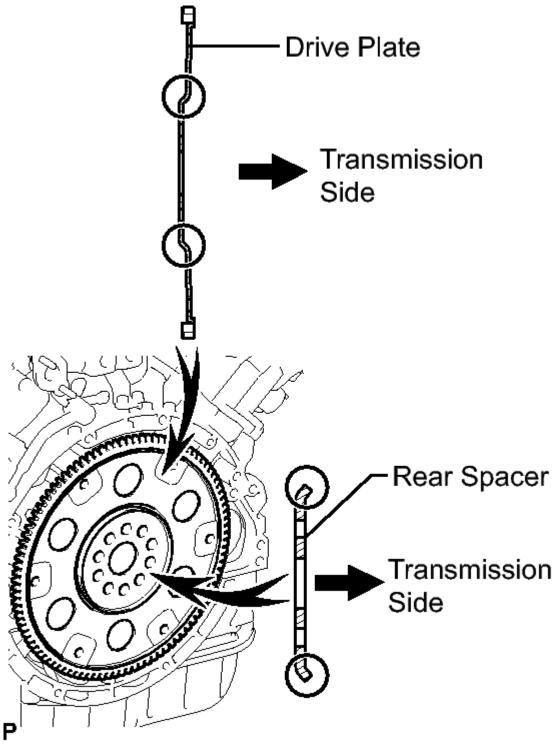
Identifying Drive Plate & Rear Drive Plate Spacer
